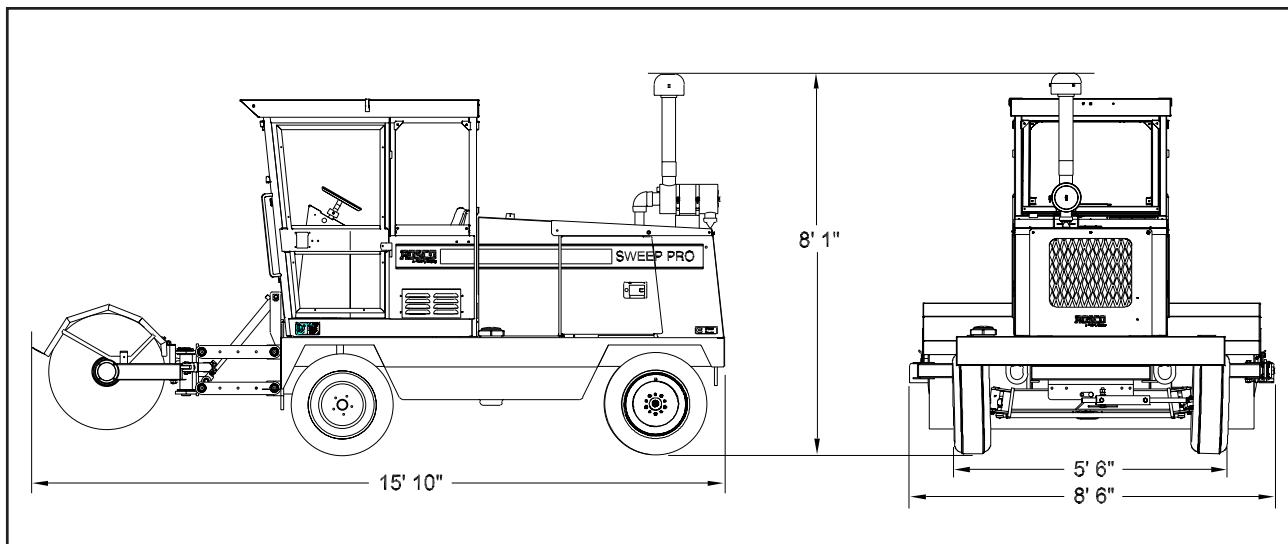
OUTLINE DIMENSIONAL DRAWING
